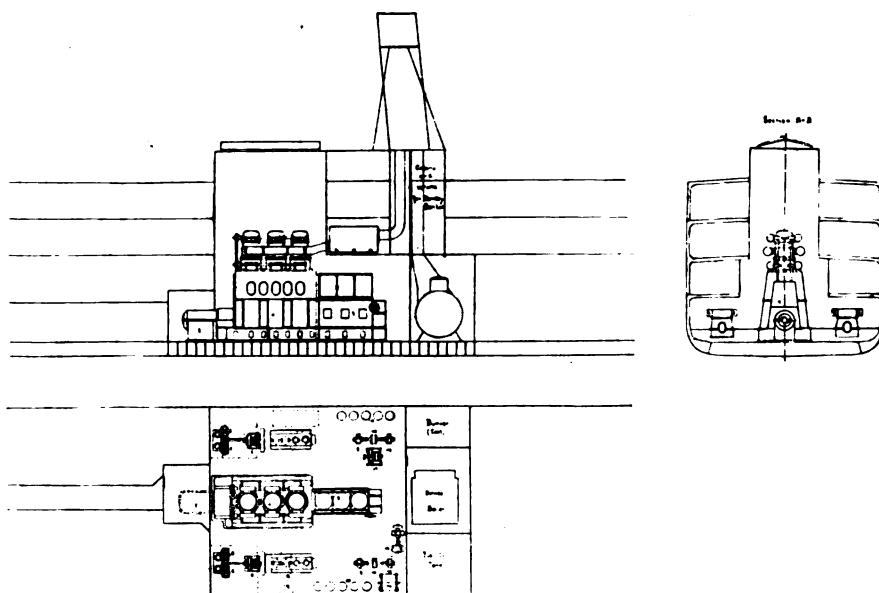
PLATE IV — ARRANGEMENT OF SINGLE SCREW NURNBERG ENGINE, 2,500 H. P.
